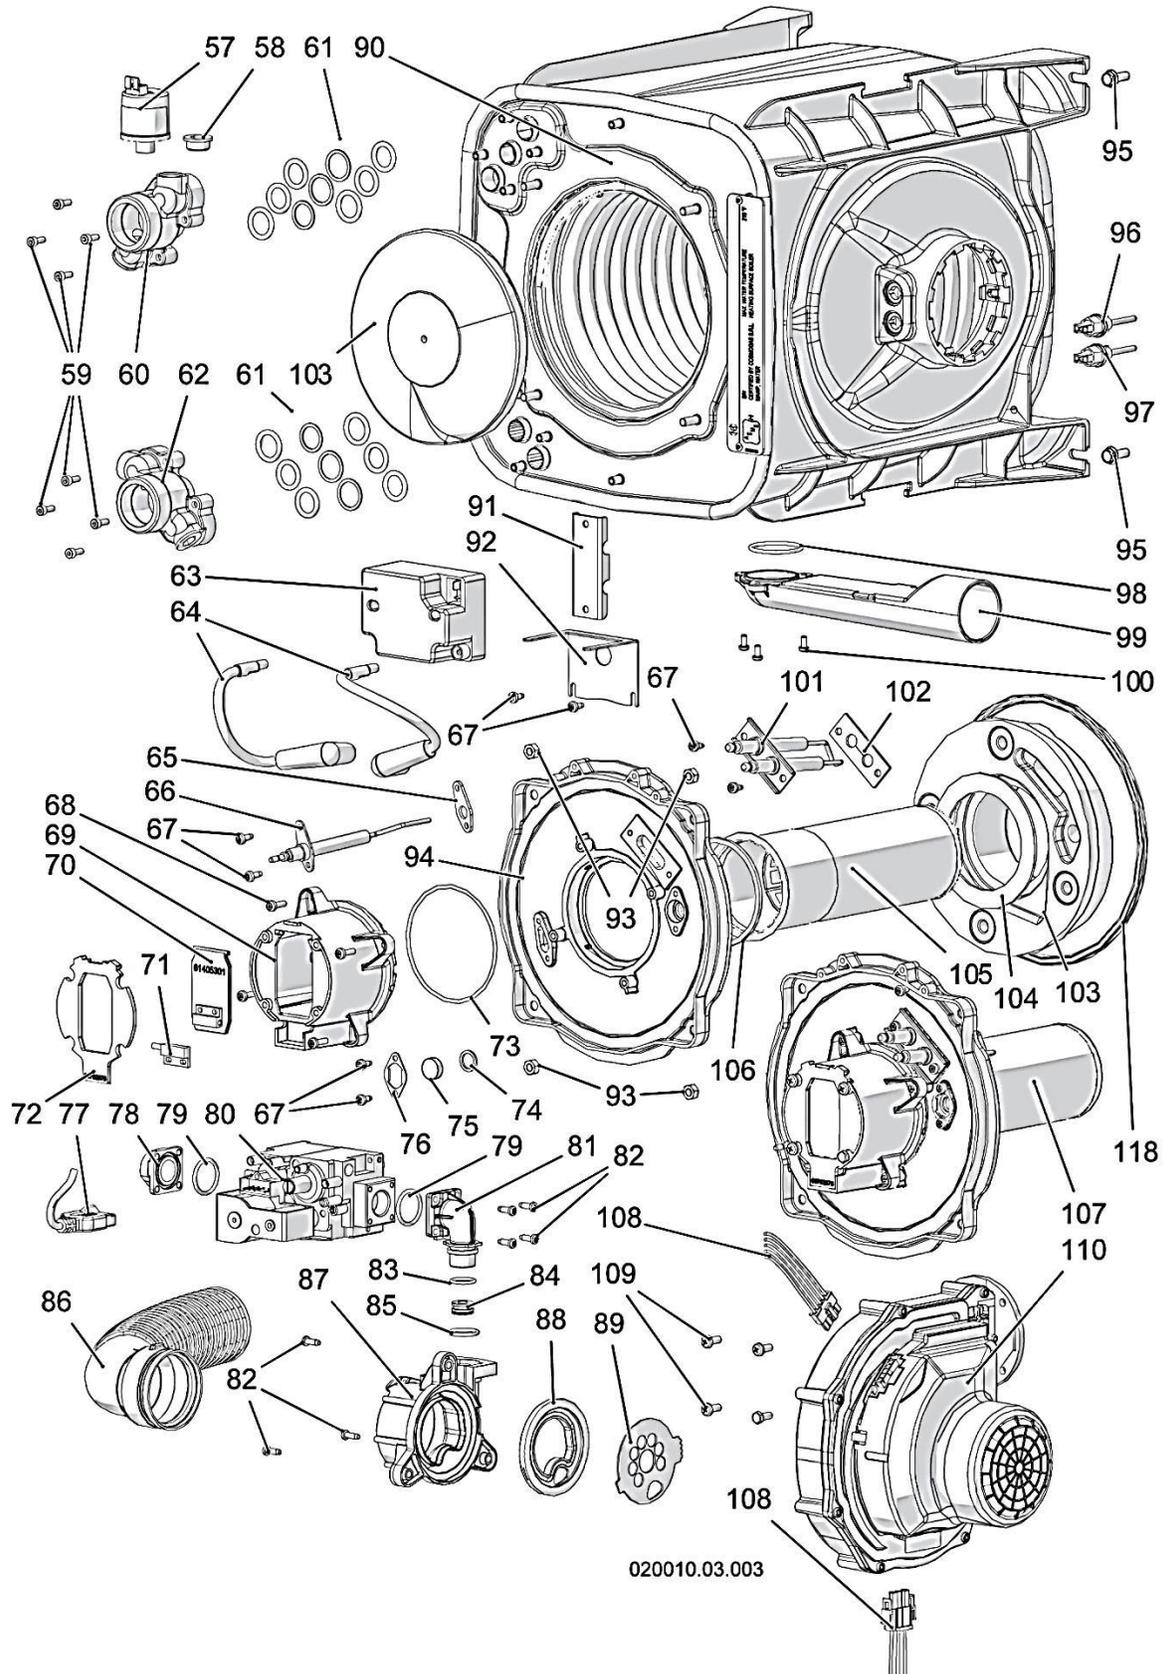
AM 750/1000 Burner/Fan Assembly Parts Drawing
